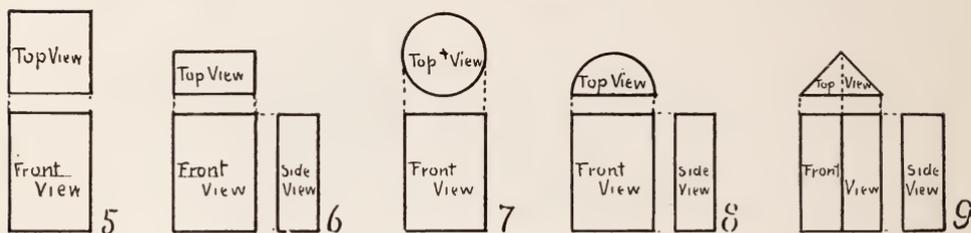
represents a top view and a side view of a *square prism*; a side view is unnecessary because it is exactly like the front view.
